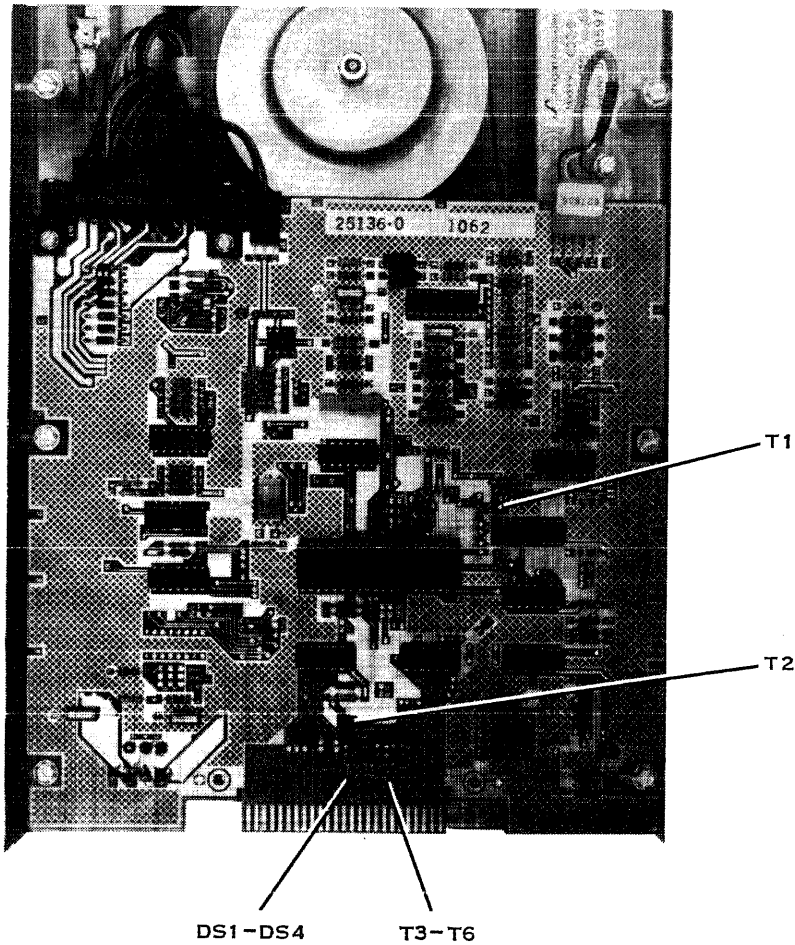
Terminator and Jumper Plug Locations for LSI Circuit Card
